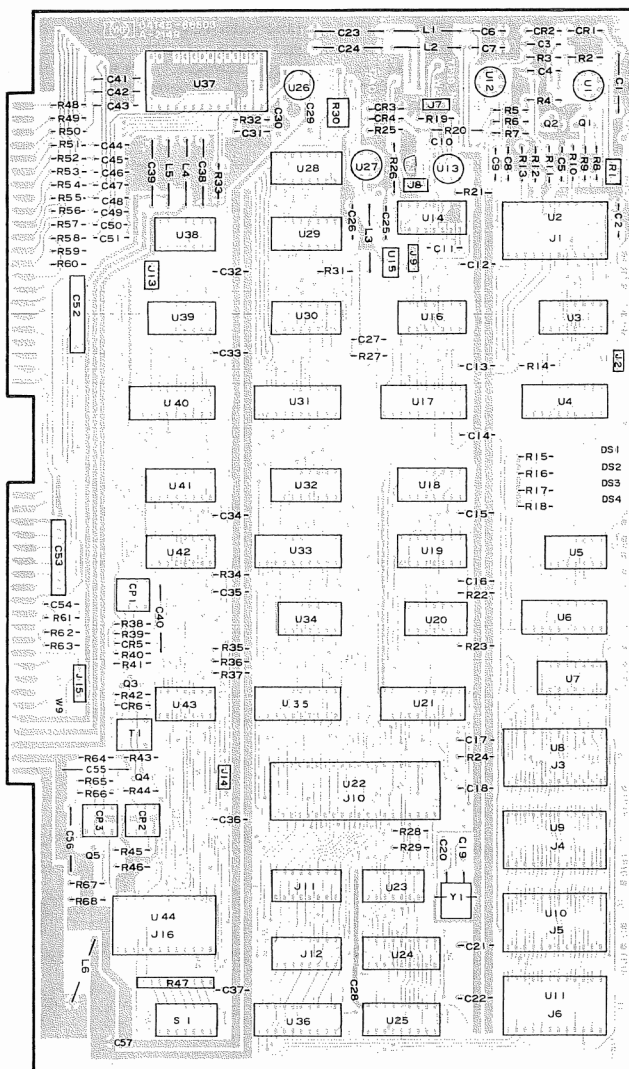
A3 SMU Control and A-D Converter Board Assembly Component Locations.
